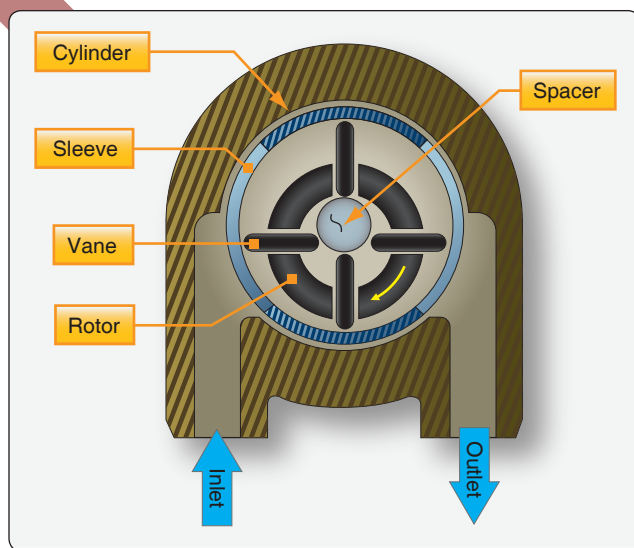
The basic mechanism of a vane-type fuel pump.
